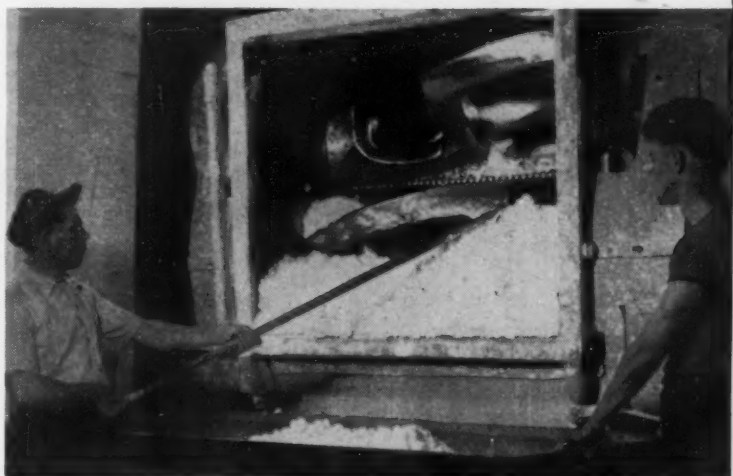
Preparation of urea molding powder is done in this mixing mill. Courtesy American Cyanamid Co.
